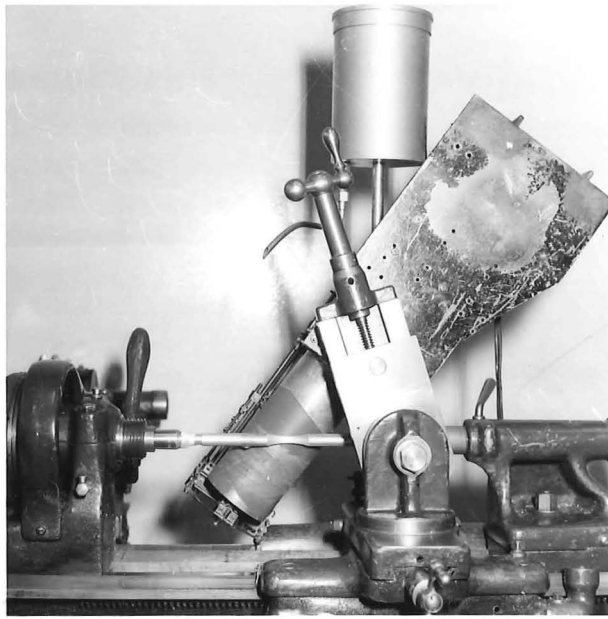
/2: Polishing machine used for final polishing of fatigue test specimens after machining.
